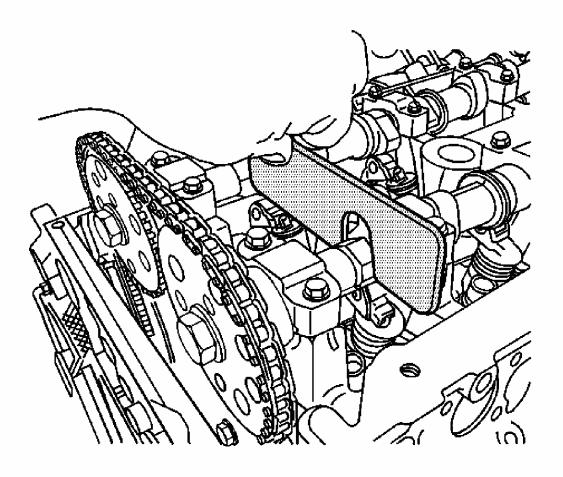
Using Camshaft Holding Tool Courtesy of GENERAL MOTORS CORP.
